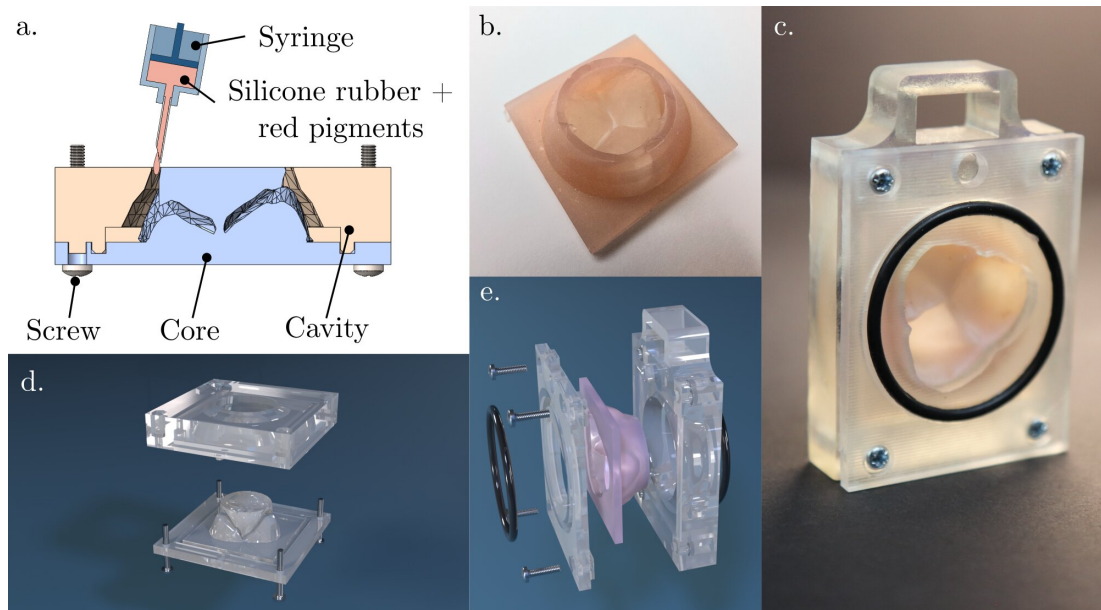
a. Cut view of the moulding assembly used to fabricate the one-way valves. b. Moulded valve. c. Cassette assembly for easy connection to the inlet/outlet manifold. d. 3D render of the moulds used for the manufacturing of the pump inlet and outlet valves. e. Exploded view of the cassette assembly used to hold the valve.
